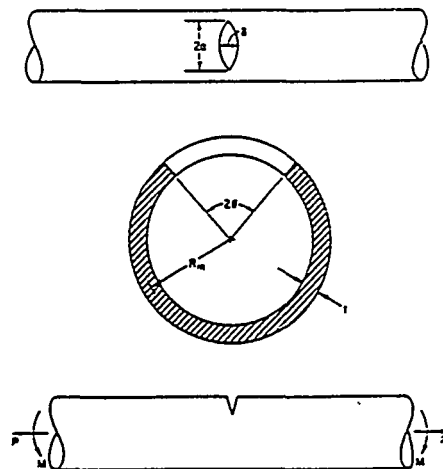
Schematic representation of pipe with a circumferential through-wall crack subjected to bending and tension
